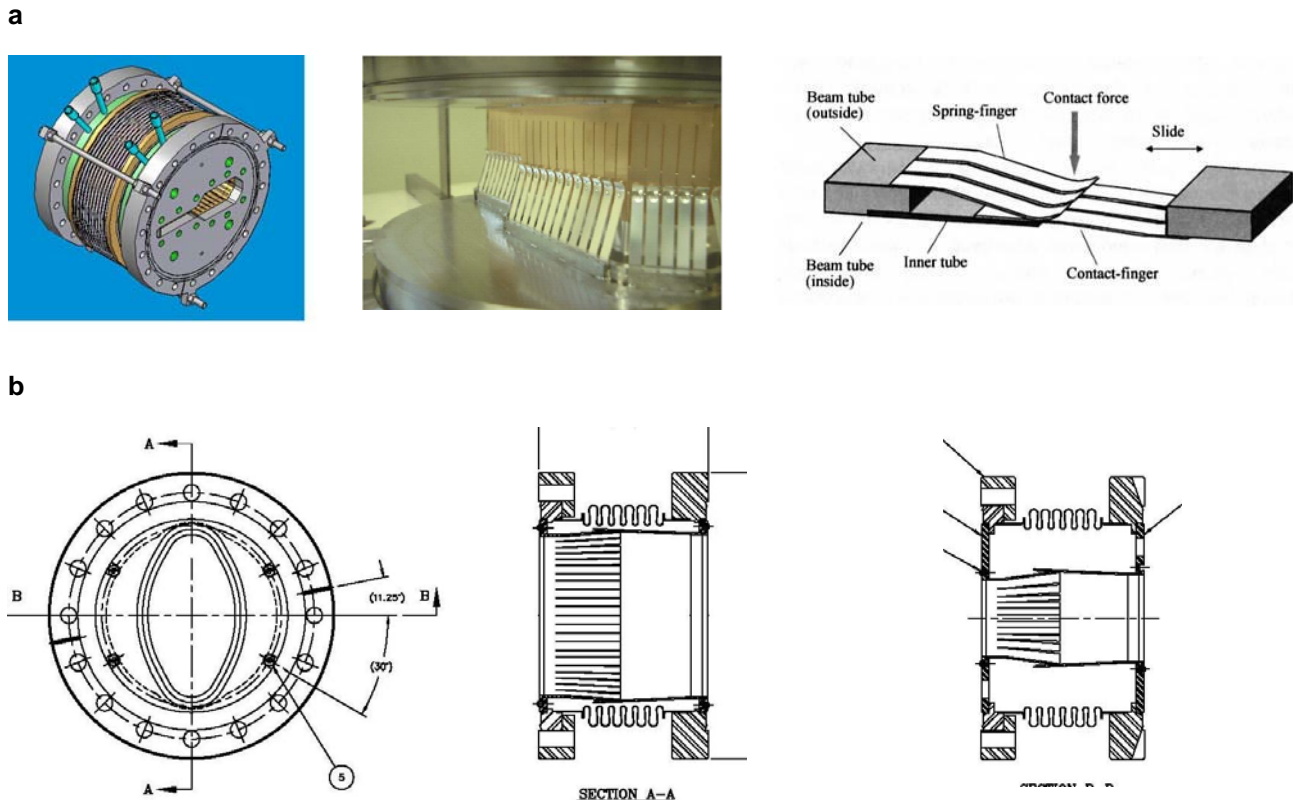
Two types of RF-shielded bellows: (a, upper row) the ones with welded bellows used in B-factories and BEPC-II with single or double fingers; and (b, lower row) the APS type with single fingers and hydro formed bellows.
